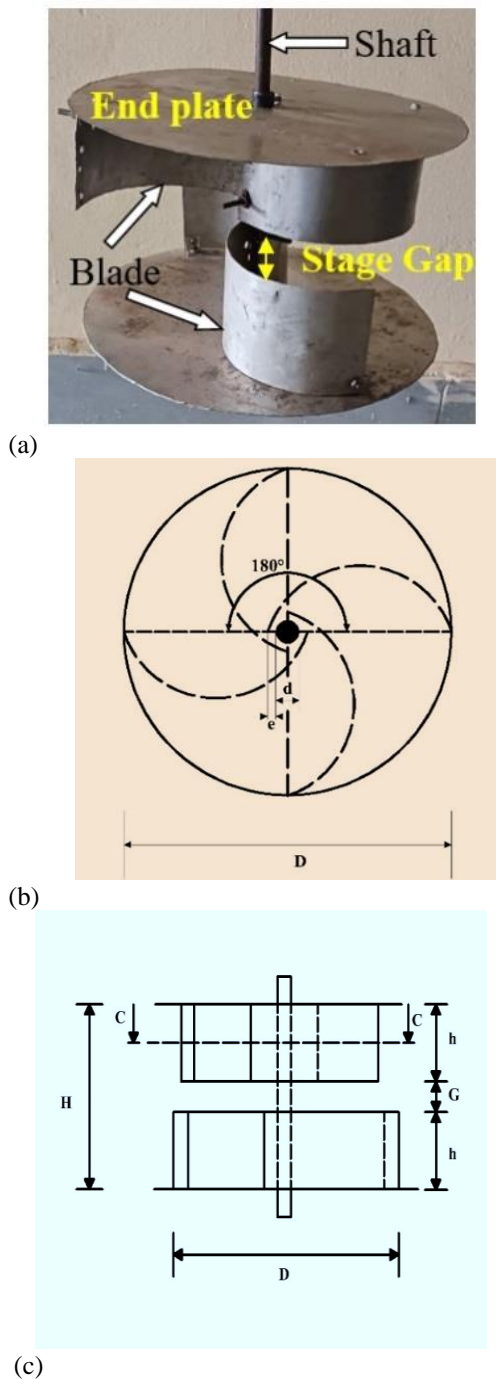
(a) Actual fabricated design; (b) turbine top view; and (c) turbine front view
